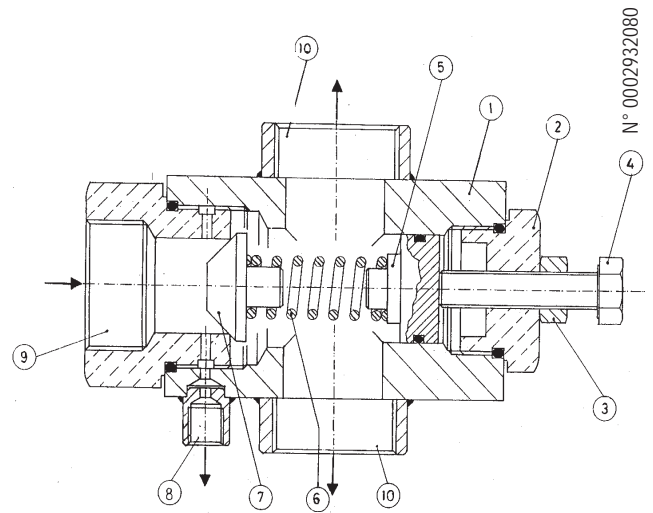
DETAIL OF FUEL PRESSURE ADJUSTING VALVE FOR AUXILIARY CIRCUIT
